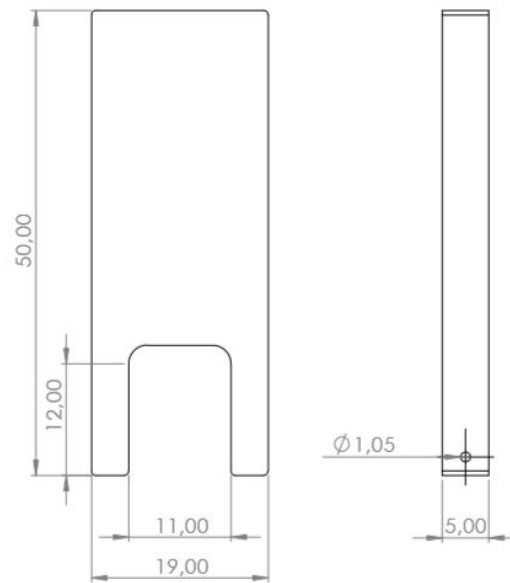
Dimensions of DCB test clamp made (all dimensions in mm).
